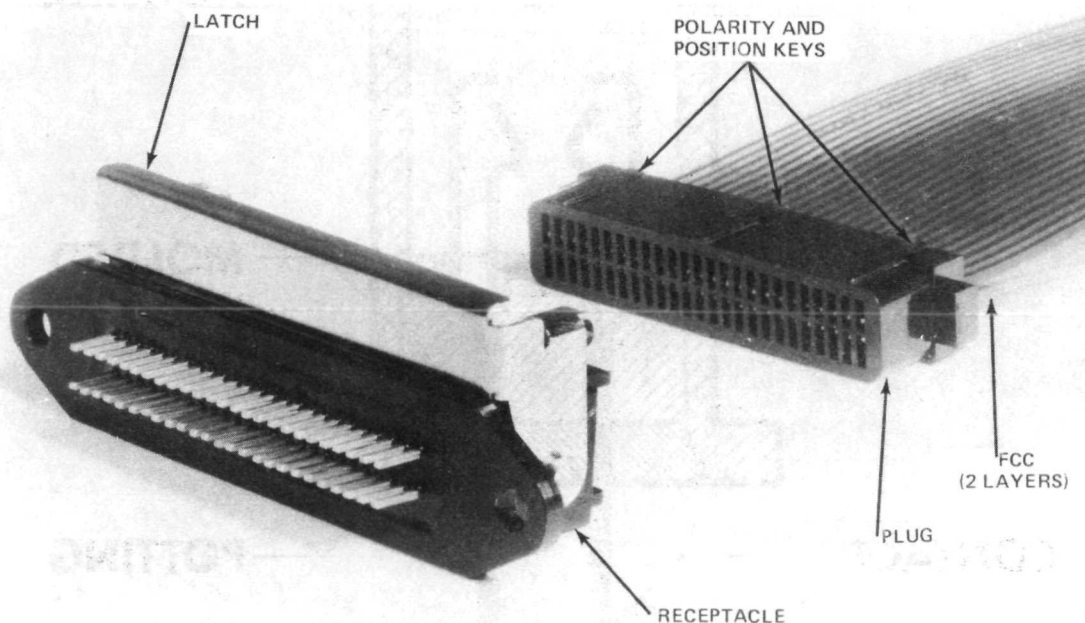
FCC to round wire cable connector with individually sealed contacts, unmated view (prototype).
